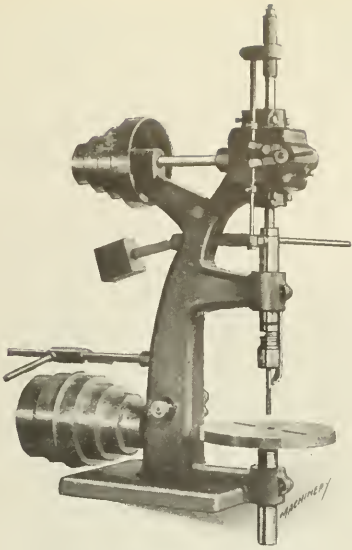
Opposite Side of "Cinti" Automatic Tapping and Drilling Machine shown in Fig. 1
